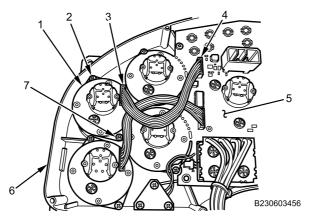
Air 1 Pressure Gauge and Harness Removal.
